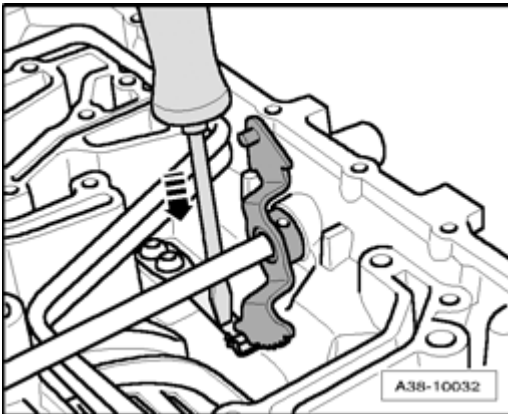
Pressing Catch Spring Downward Using Screwdriver
